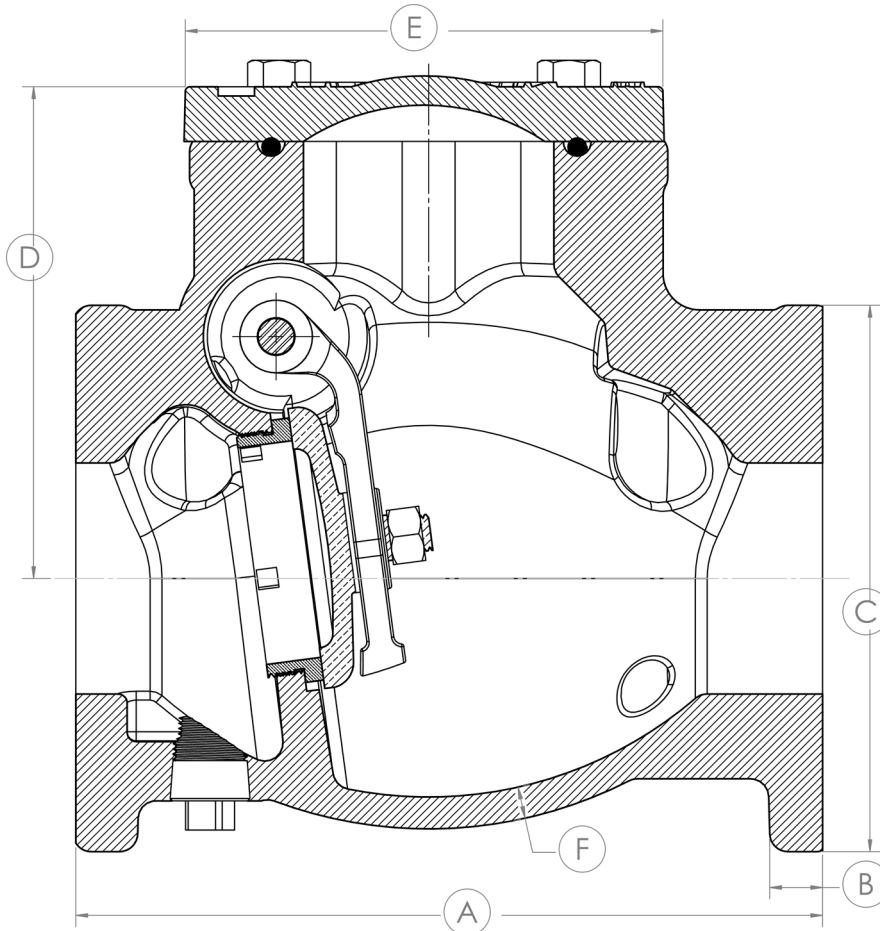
& 1126A COMMON REFERENCE DIMENSION 2.5" TO 12"
